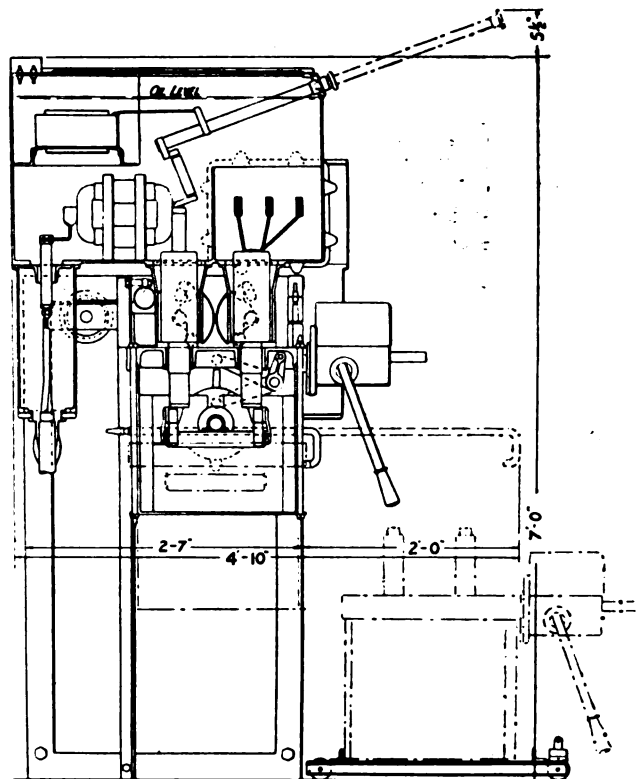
Metal-clad oil-insulated switchgear unit.
